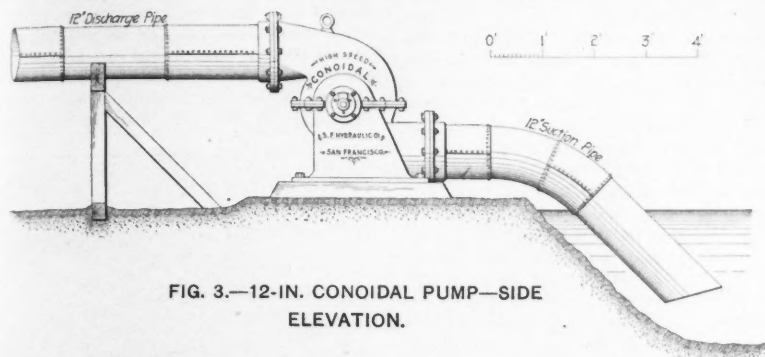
12-IN. CONOIDAL PUMP—SIDE ELEVATION.
